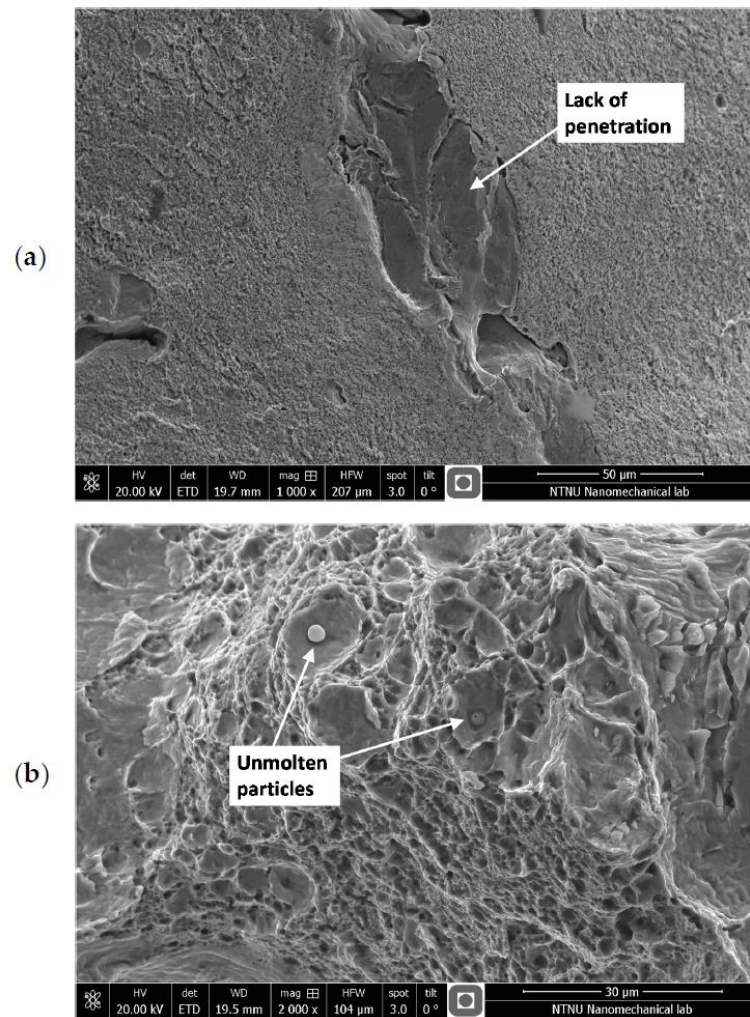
Common defects observed on fracture surface: (a) lack of penetration, and (b) unmolten particles.
